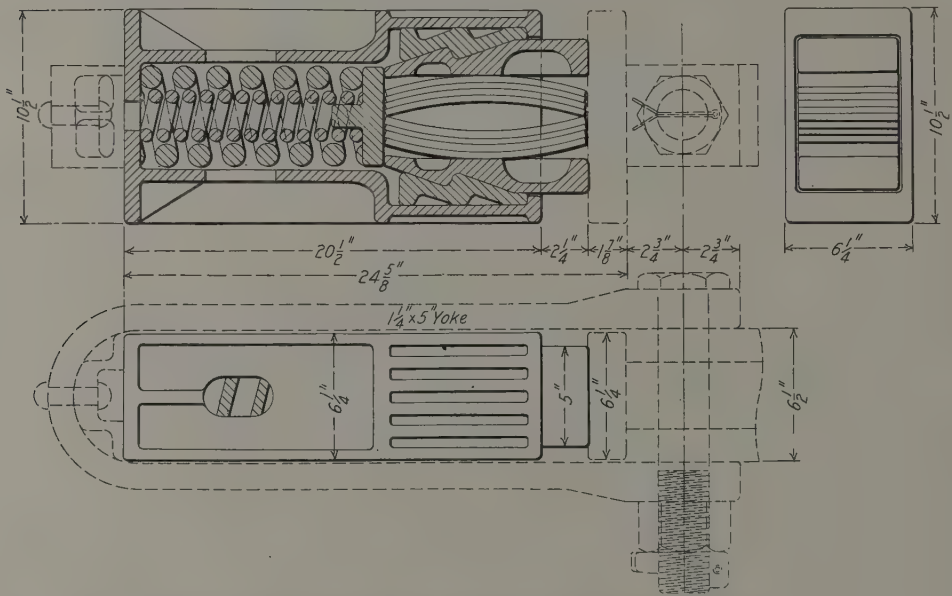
Gould Passenger Friction Draft Gear FDG-56. Gould Coupler Company.
